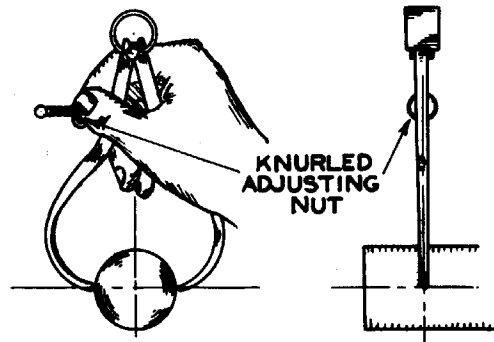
TAKING A MEASUREMENT WITH AN OUTSIDE CALIPER
